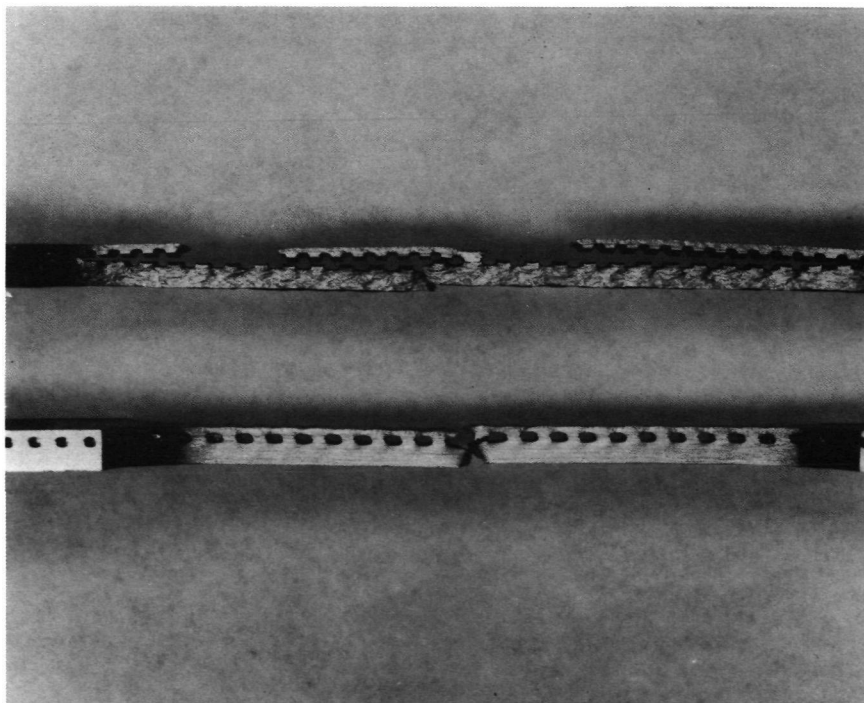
Electron Beam Welded Bend Test Sample PWA-5
